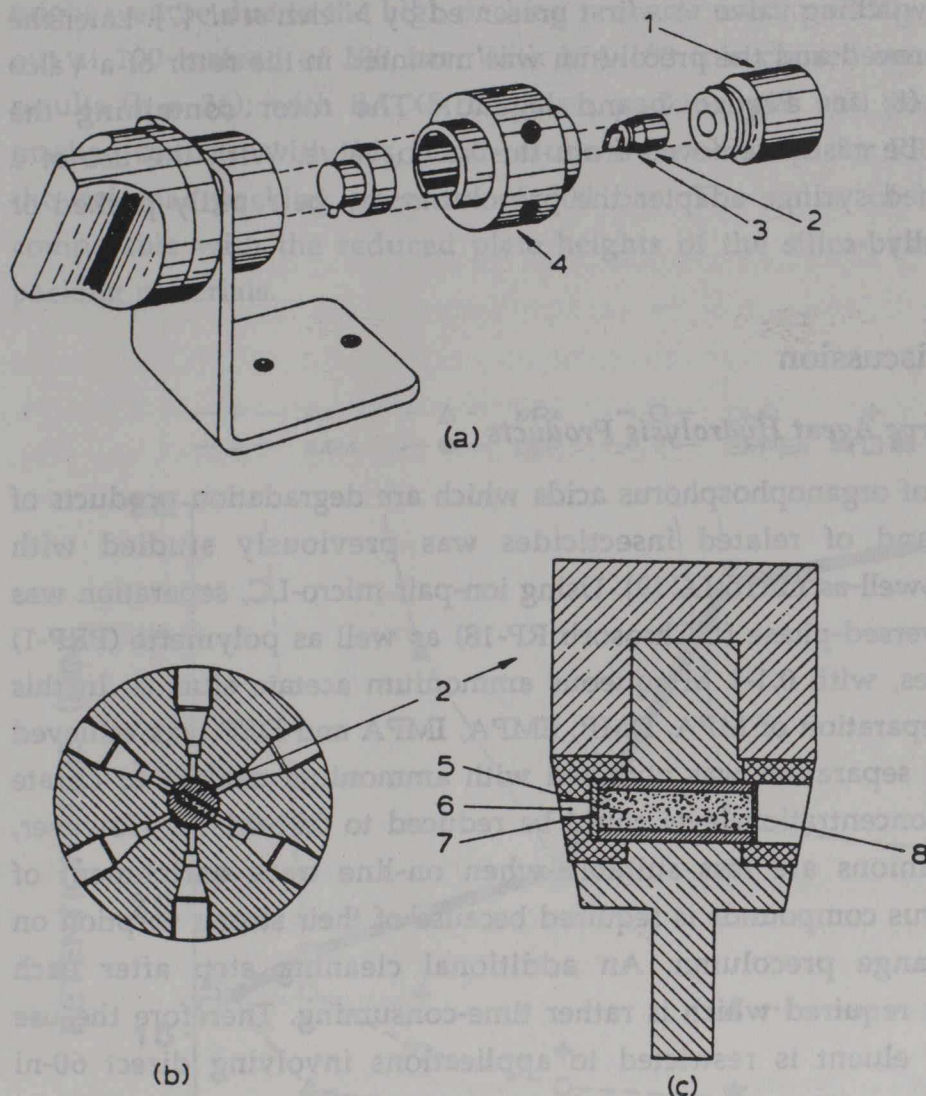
Switching valve with internal precolumn [ref. 9]. (a) General view; (b) top view of cross-section of rotor with pre-column; (c) almost totally drilled through rotor to give 4 mm x 1.1 mm internal diameter. 1, Preload assembly; 2, rotor; 3, seal; 4, valve body; 5, precolumn; 6, outlet precolumn; 7 and 8, screens. The column packing material is held between two 36  $\mu$ m stainless-steel screens, one at the end and one at the front of the column. Both screens are held by PTFE ring inserts. The laboratory-made seal is permanently fitted around the rotor; it contains two opposite grooves on its surface instead of the three grooves for the standard Valco valve.
